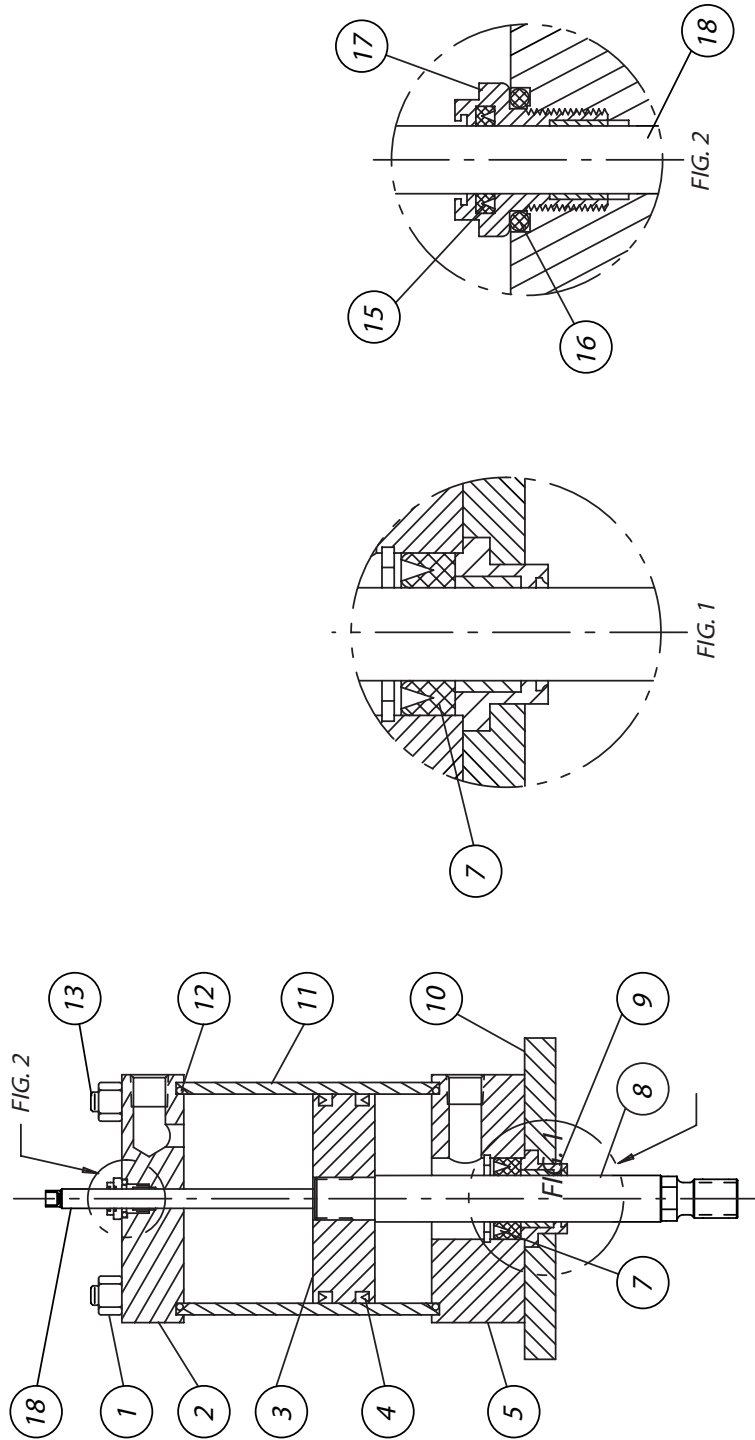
Tail Rod Cylinder (8 in. - 14 in. Bore)
